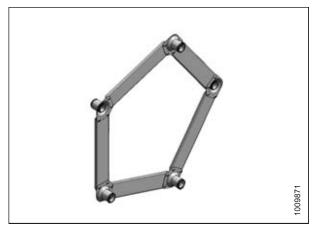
Five-Bat Reinforcing Kit Shown – Six-Bat Reinforcing Kit Similar
